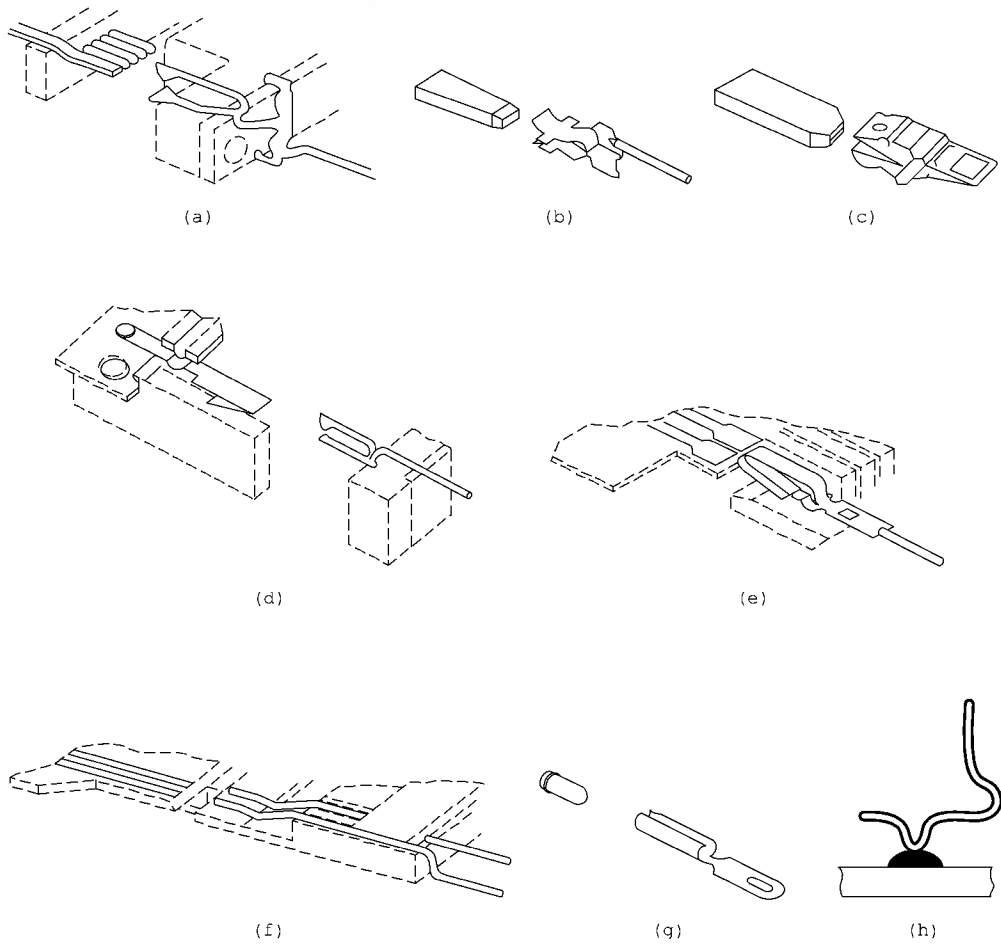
Contact spring configurations for separable electronic connectors. Examples (a)–(g) are engaged by sliding the spring contact and its mating member together: (a)–(d) are blade-fork contacts; (e), folded cantilever contact for printed circuit boards; (f), straight cantilever contact for printed circuit boards; (g), pin-socket contact; and (h), butting contact. (a)–(g)
